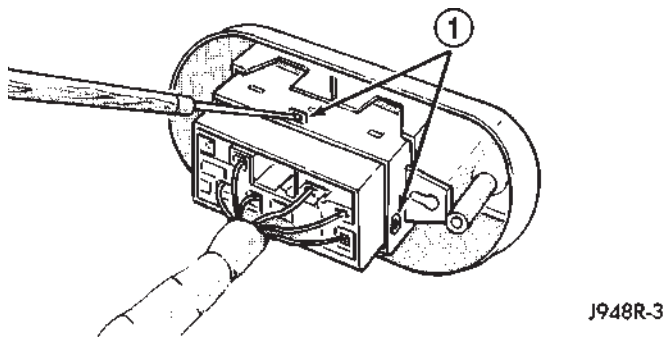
Power Seat Switch Connector Remove - Standard Cab
